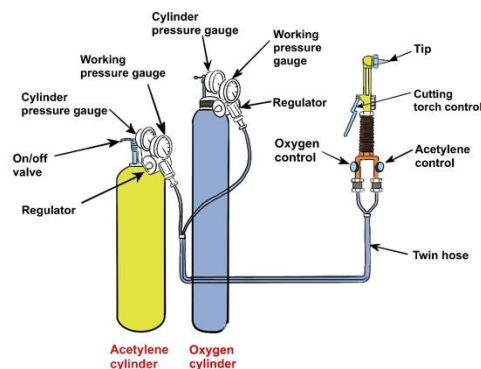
oxyacetylene gas welding and cutting equipment
